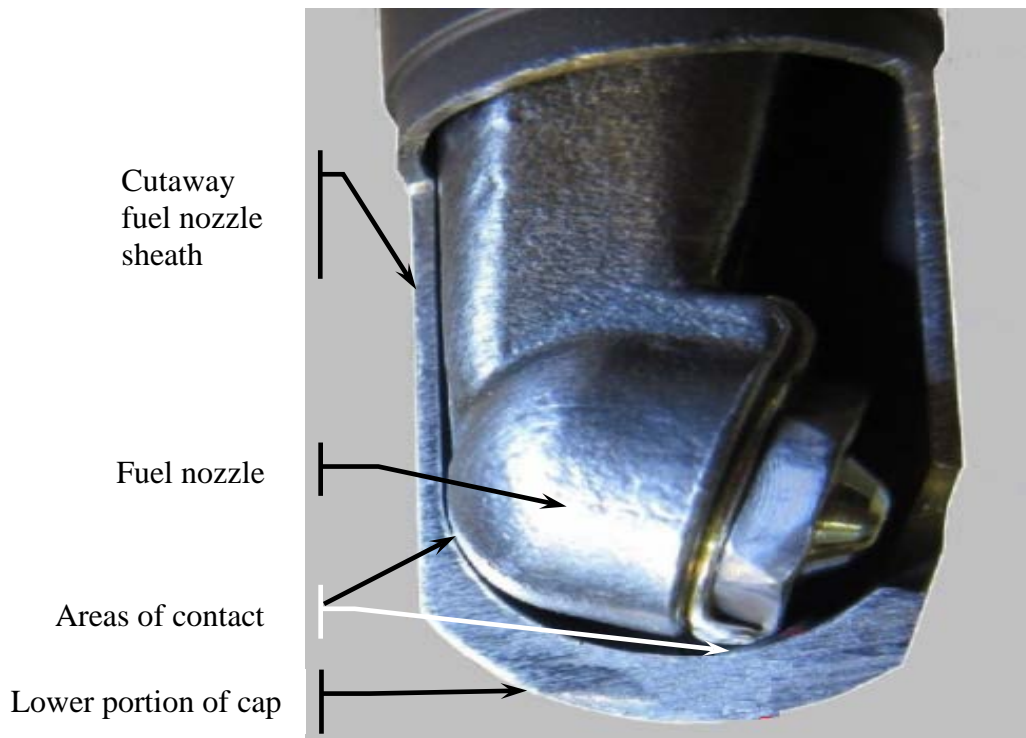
Fuel Nozzle inside Cutaway Sheath
